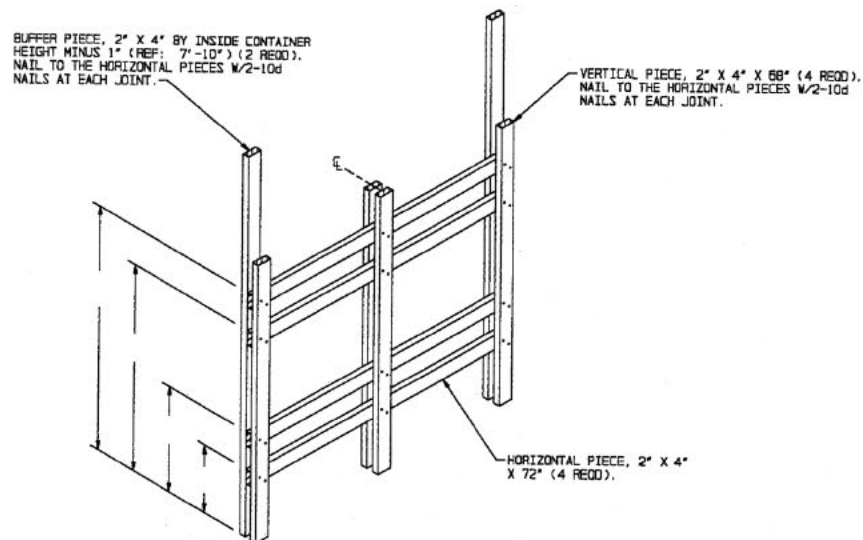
Examples of side fill assemblies (sheet 1 of 2).
